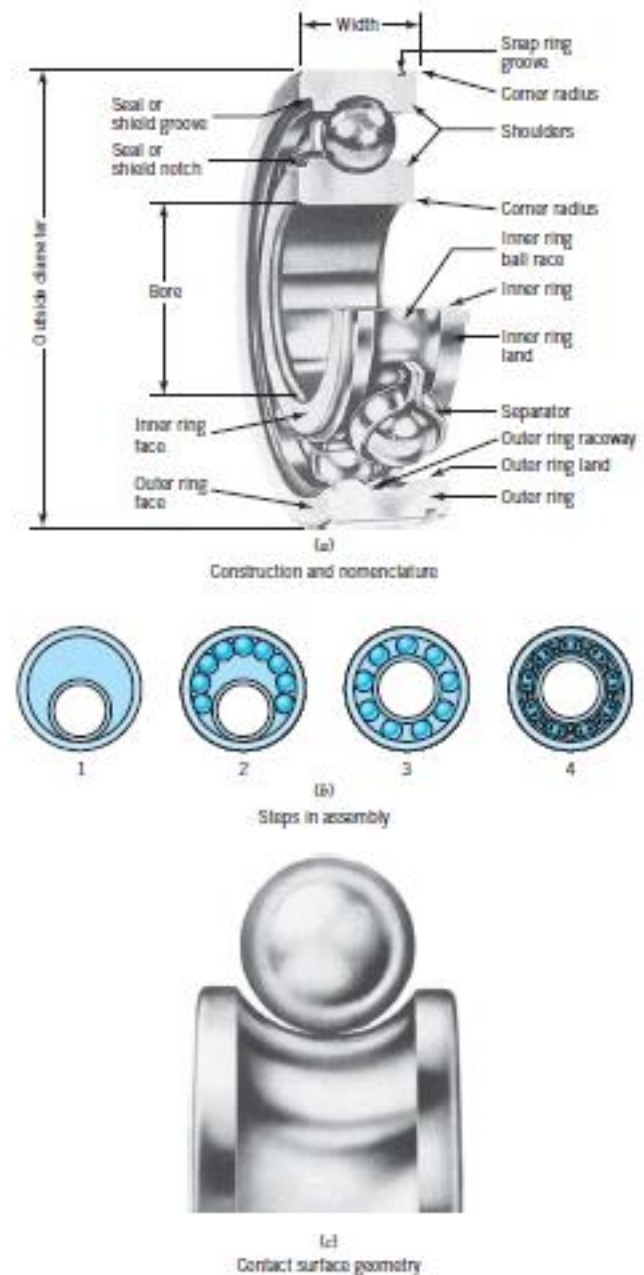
Radial ball bearing (deep-groove or “Conrad” type). (Courtesy New Departure-Hyatt Bearing Division, General Motors Corporation.)
